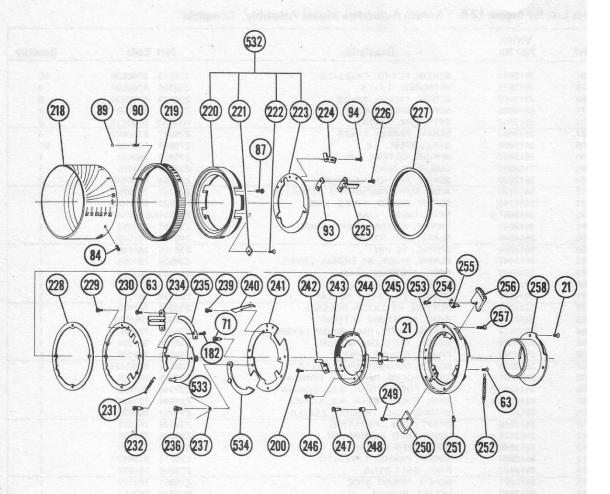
Olympus OM Mount Assembly, Complete (Ref 541, Pg 55)
